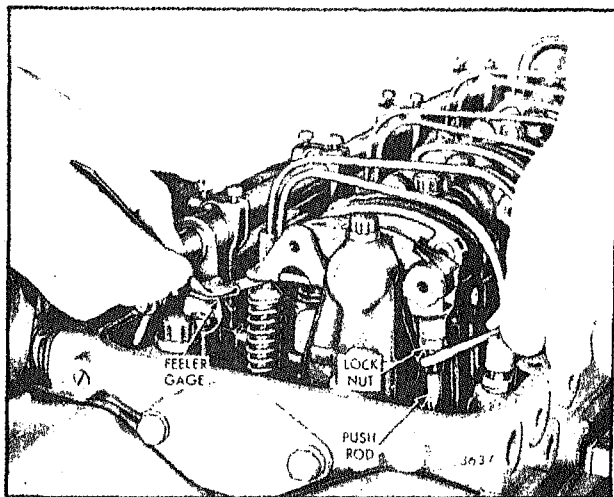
Adjusting Valve Clearance (Four Valve Head)
